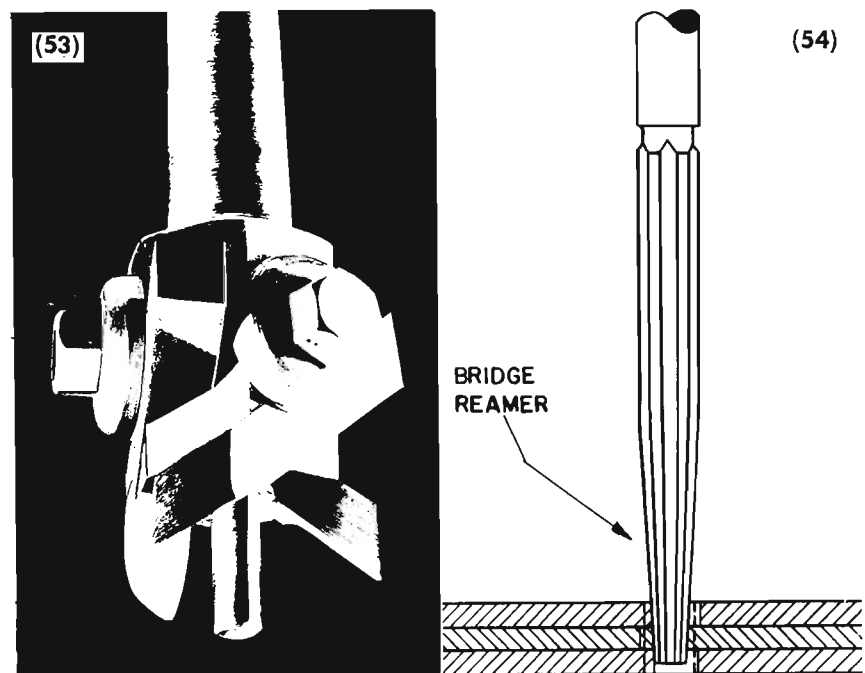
Tool for cutting 1-9/16-inch and 2-1/16-inch-diameter holes in steel.
